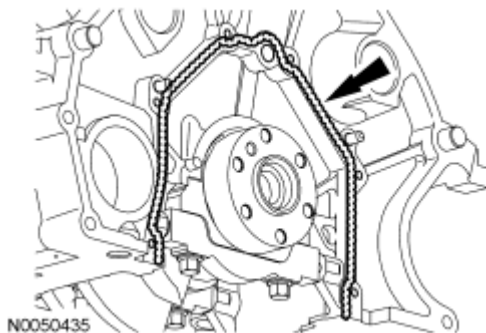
Applying Bead Of Gasket Maker To Rear Crankshaft Seal Retainer
